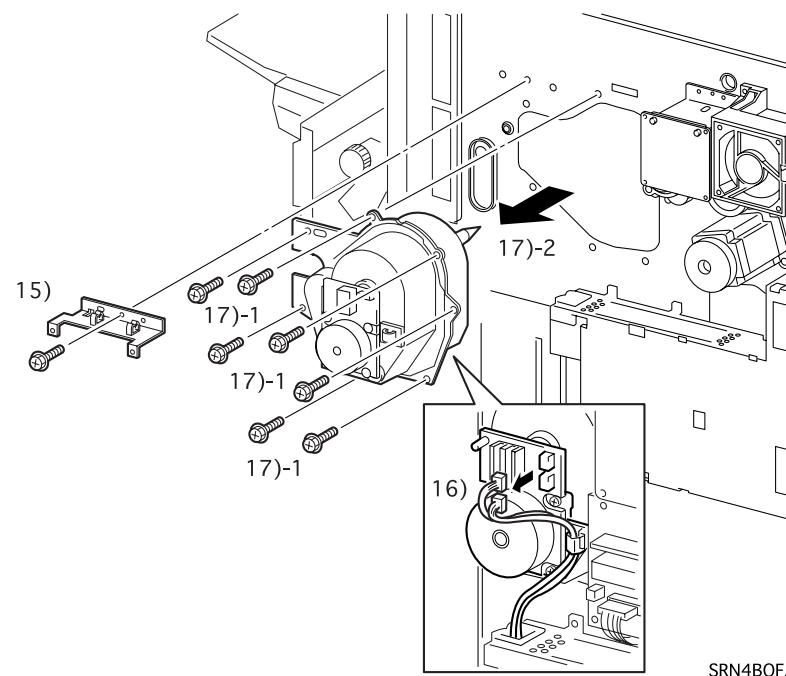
PROCESS MOTOR ASSEMBLY Removal
